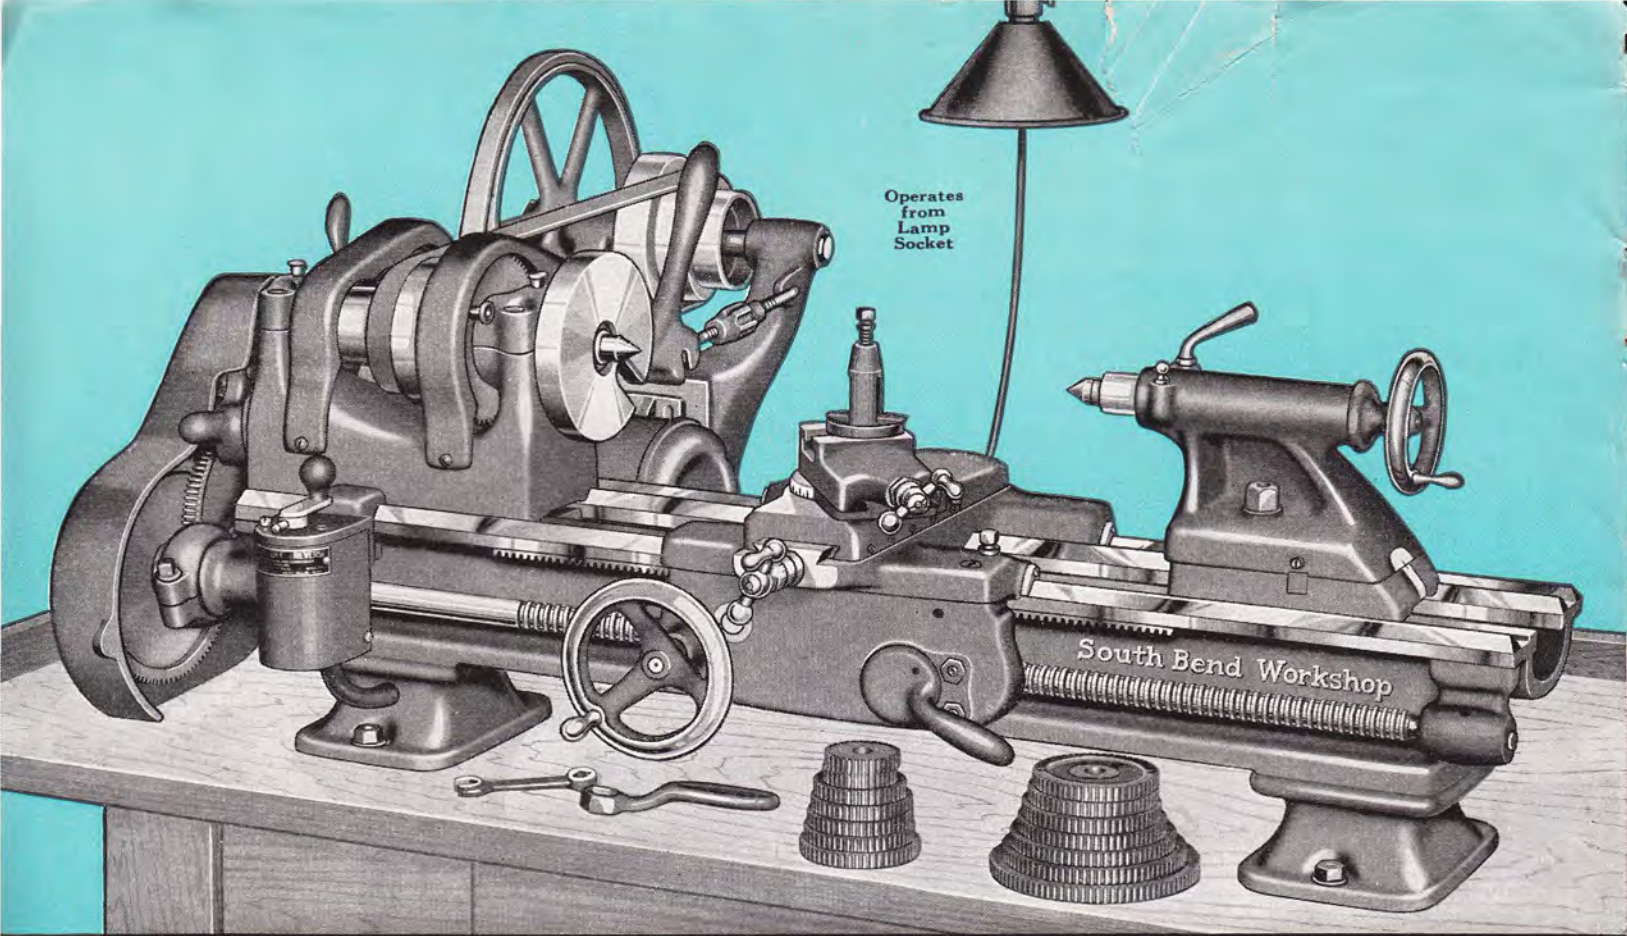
Cat. No. 415-YA, 9"x3' "Workshop" Motor Driven Precision Bench Lathe, complete as shown, but less bench. (Ship. wt. crated 320 lbs.)... \$116.00
